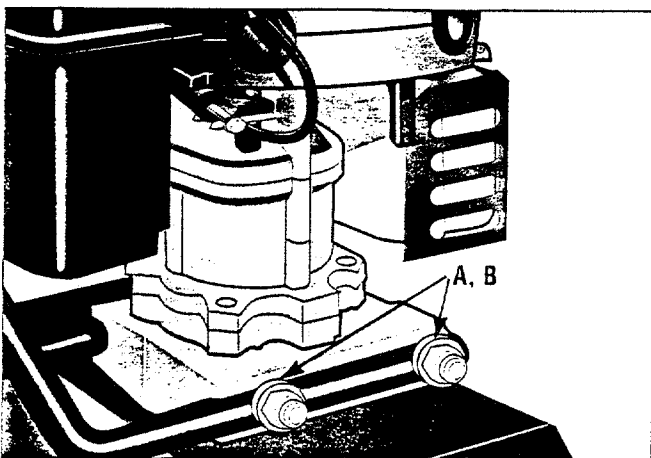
Install Lower Right Handlebar. Secure with two flat washers (A) and two locknuts (B).
